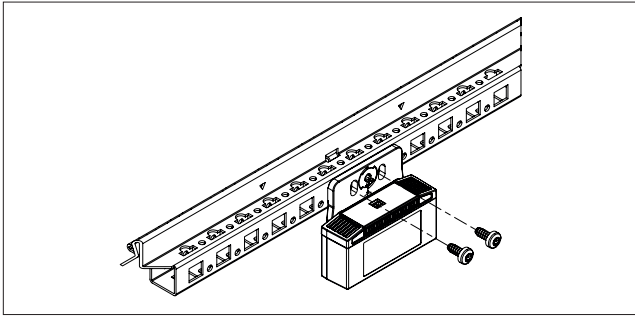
Optional securing of the bracket (enclosure section "X" or enclosure section "Z")
